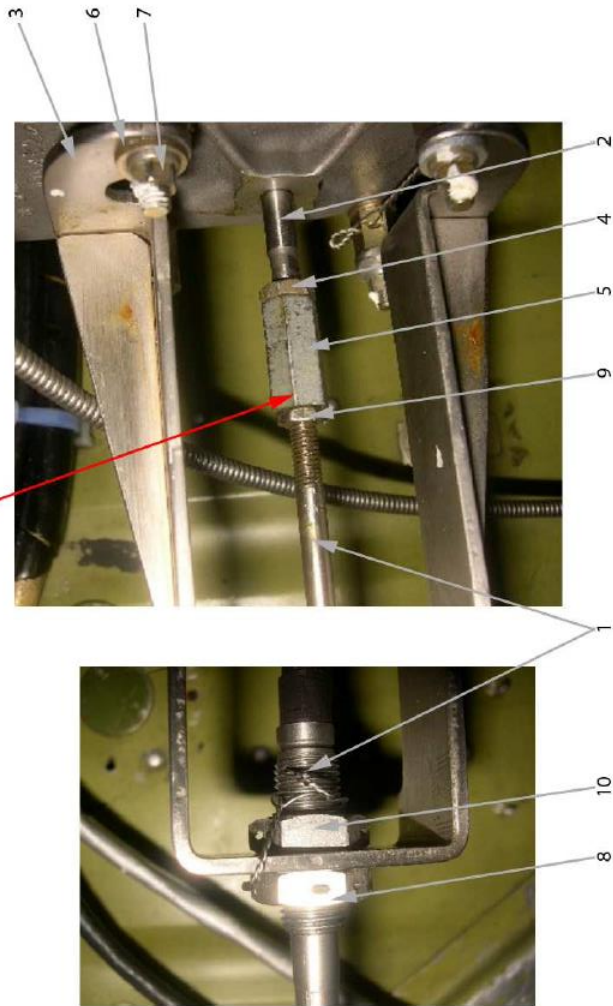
ENGINE MODE SELECTOR CABLE INSTALLATION
